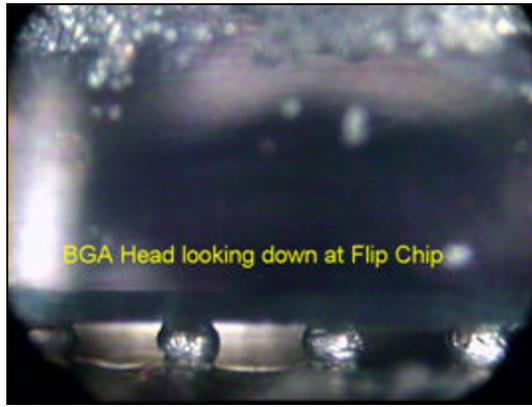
Standard BGA Optics Look Down at Bottom Fillet
